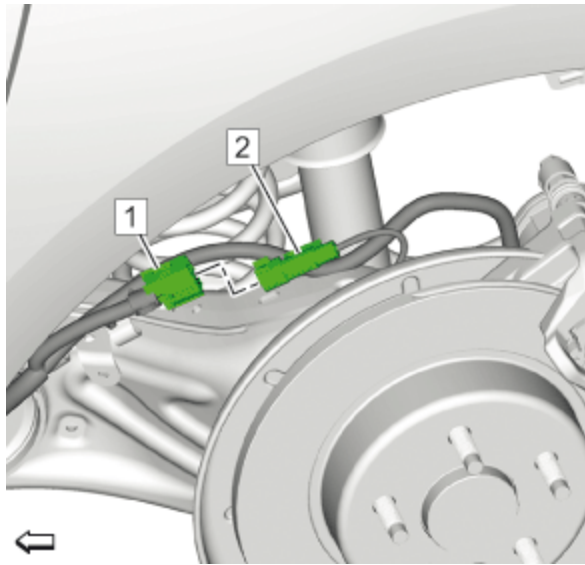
Wiring Harness Rear Wheel Speed Sensor
